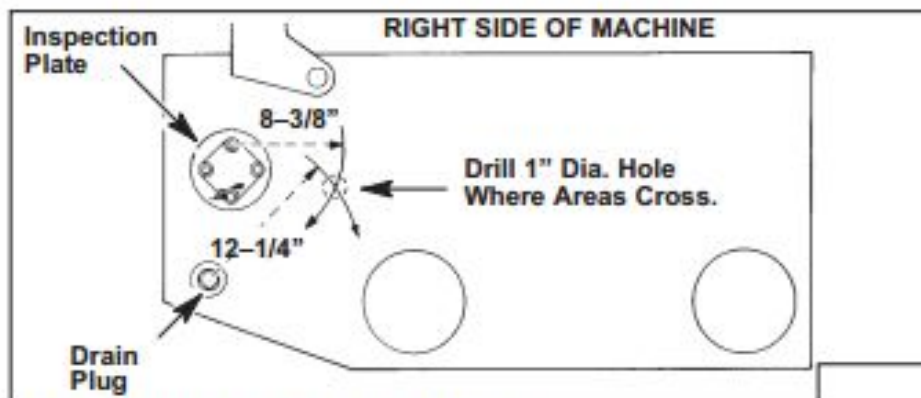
Locating Fuel Adjustment Hole (Petter)
